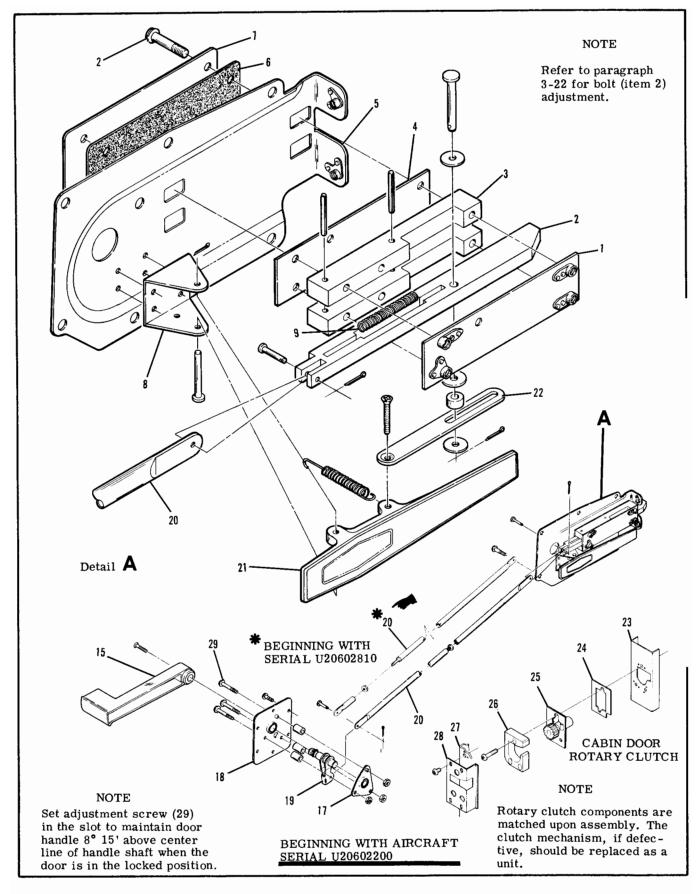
Door Latch and Rotary Clutch Components (Sheet 2 of 2)
